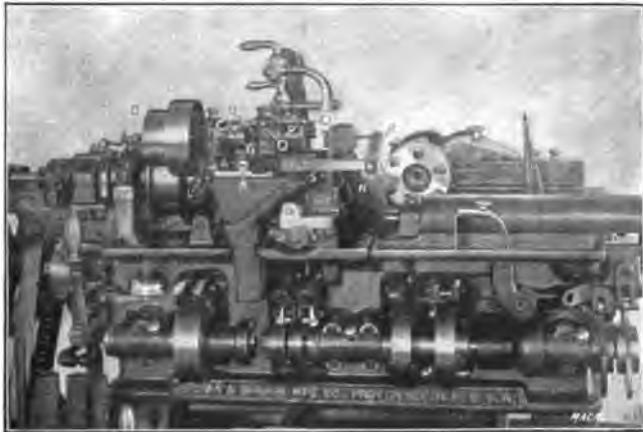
Front View of No. 00 Brown & Sharpe Automatic Screw Machine equipped with a Burring Attachment
